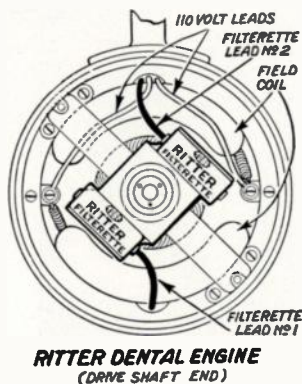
Location of Tobe Ritter Dental Filterette inside motor shell.
